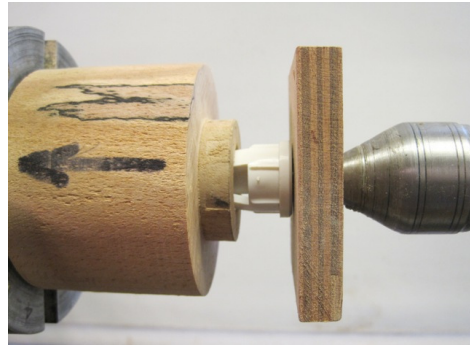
drive plug being pressed into the top of a *shaft* mill.
